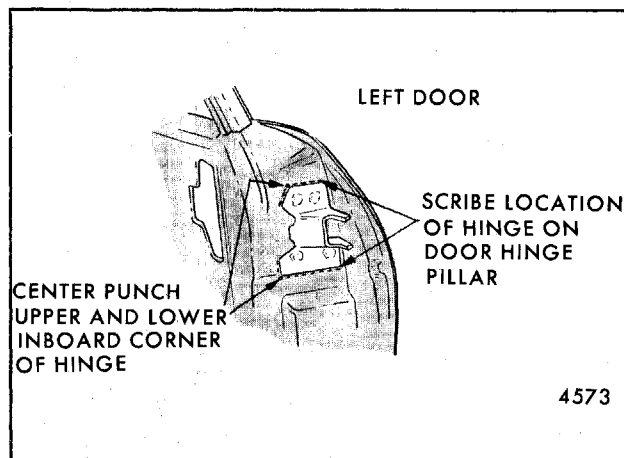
Locating Hinge on Door Hinge Pillar - "X" Styles
